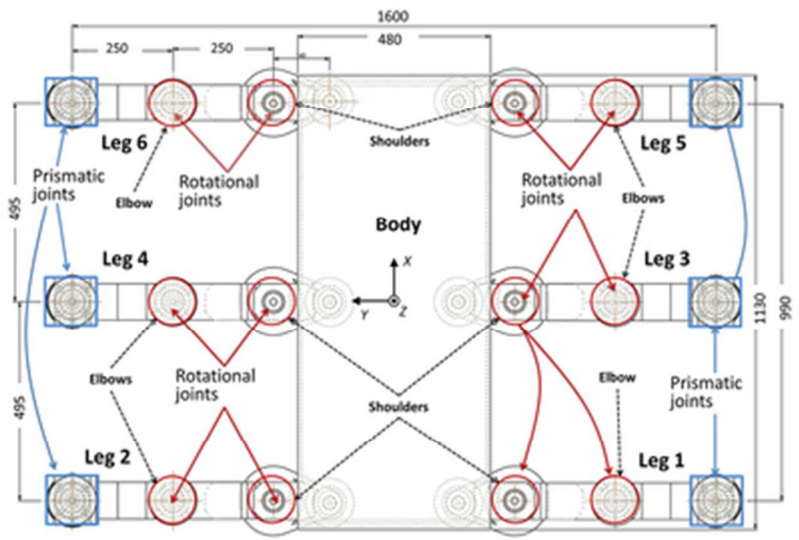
Mechanical configuration of the hexapod robot (units in mm). (a) Top view of the robot.
